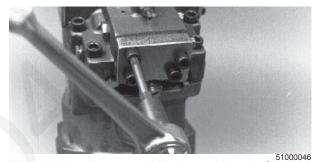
Remove Minimum Angle Servo Cover Screws
